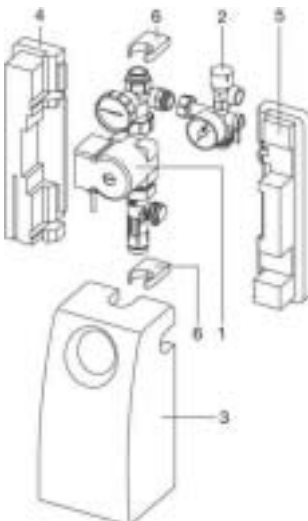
Pump fittings assembly clipped into the wall mounting brackets
